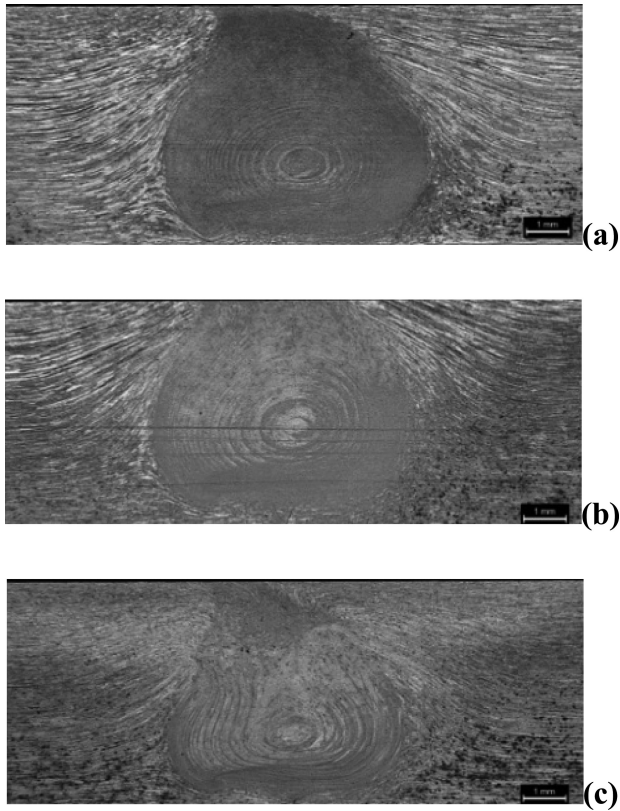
shows macroscopic appearances of the cross-section of joints welded at  $750 \text{ min}^{-1}$  utilizing three welding speed (73, 116 and 150 mm/min). All welded joints have the porosity as defects. HAZs are recognized as slightly dark areas on both sides of SZ. Average grain size in SZ depends mainly on the peak temperature and strain rate. The grain size in SZ increases with increasing peak temperature and decreasing strain rate. Since all the welds were fabricated at the constant rotation speed in the present study, strain rate is constant and therefore, grain size in SZ depends only on the peak temperature.
